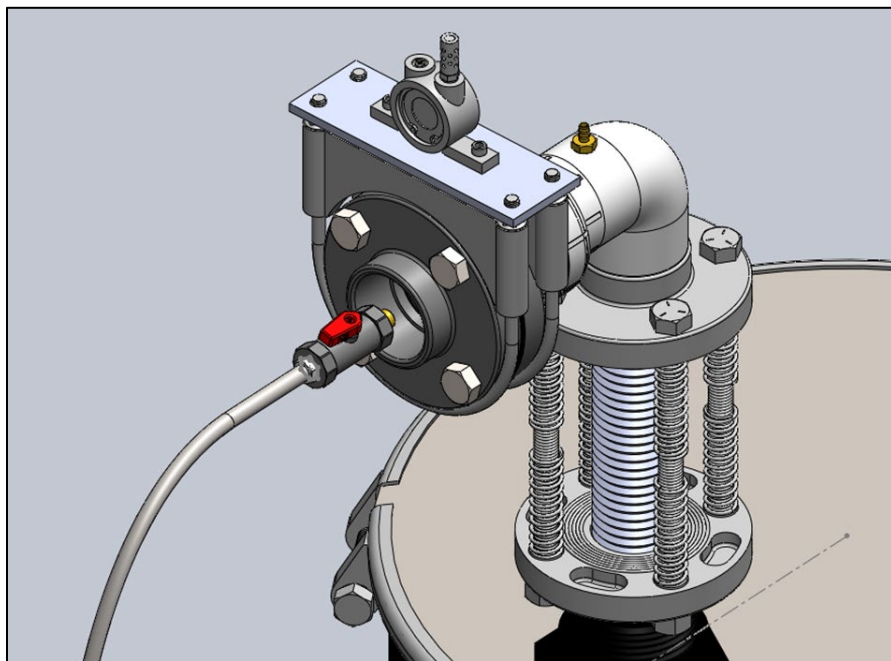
3D drawing of a modified experimental set up with a vibrating system.
